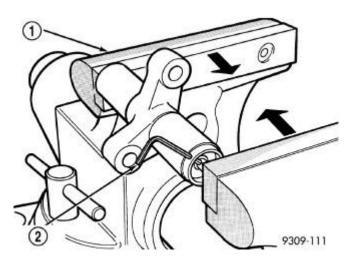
Compressing Timing Belt Tensioner Courtesy of CHRYSLER LLC
